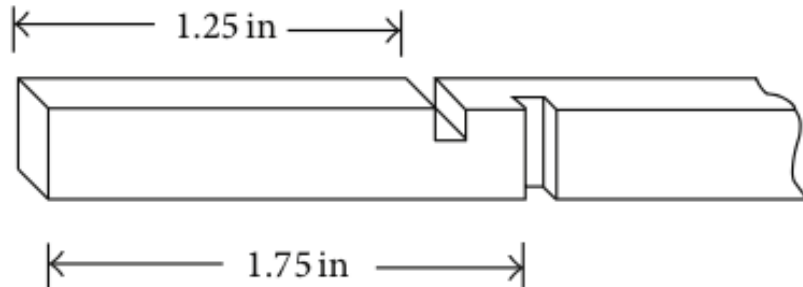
Dimensions of samples tested by French et al. and test setup [12]
